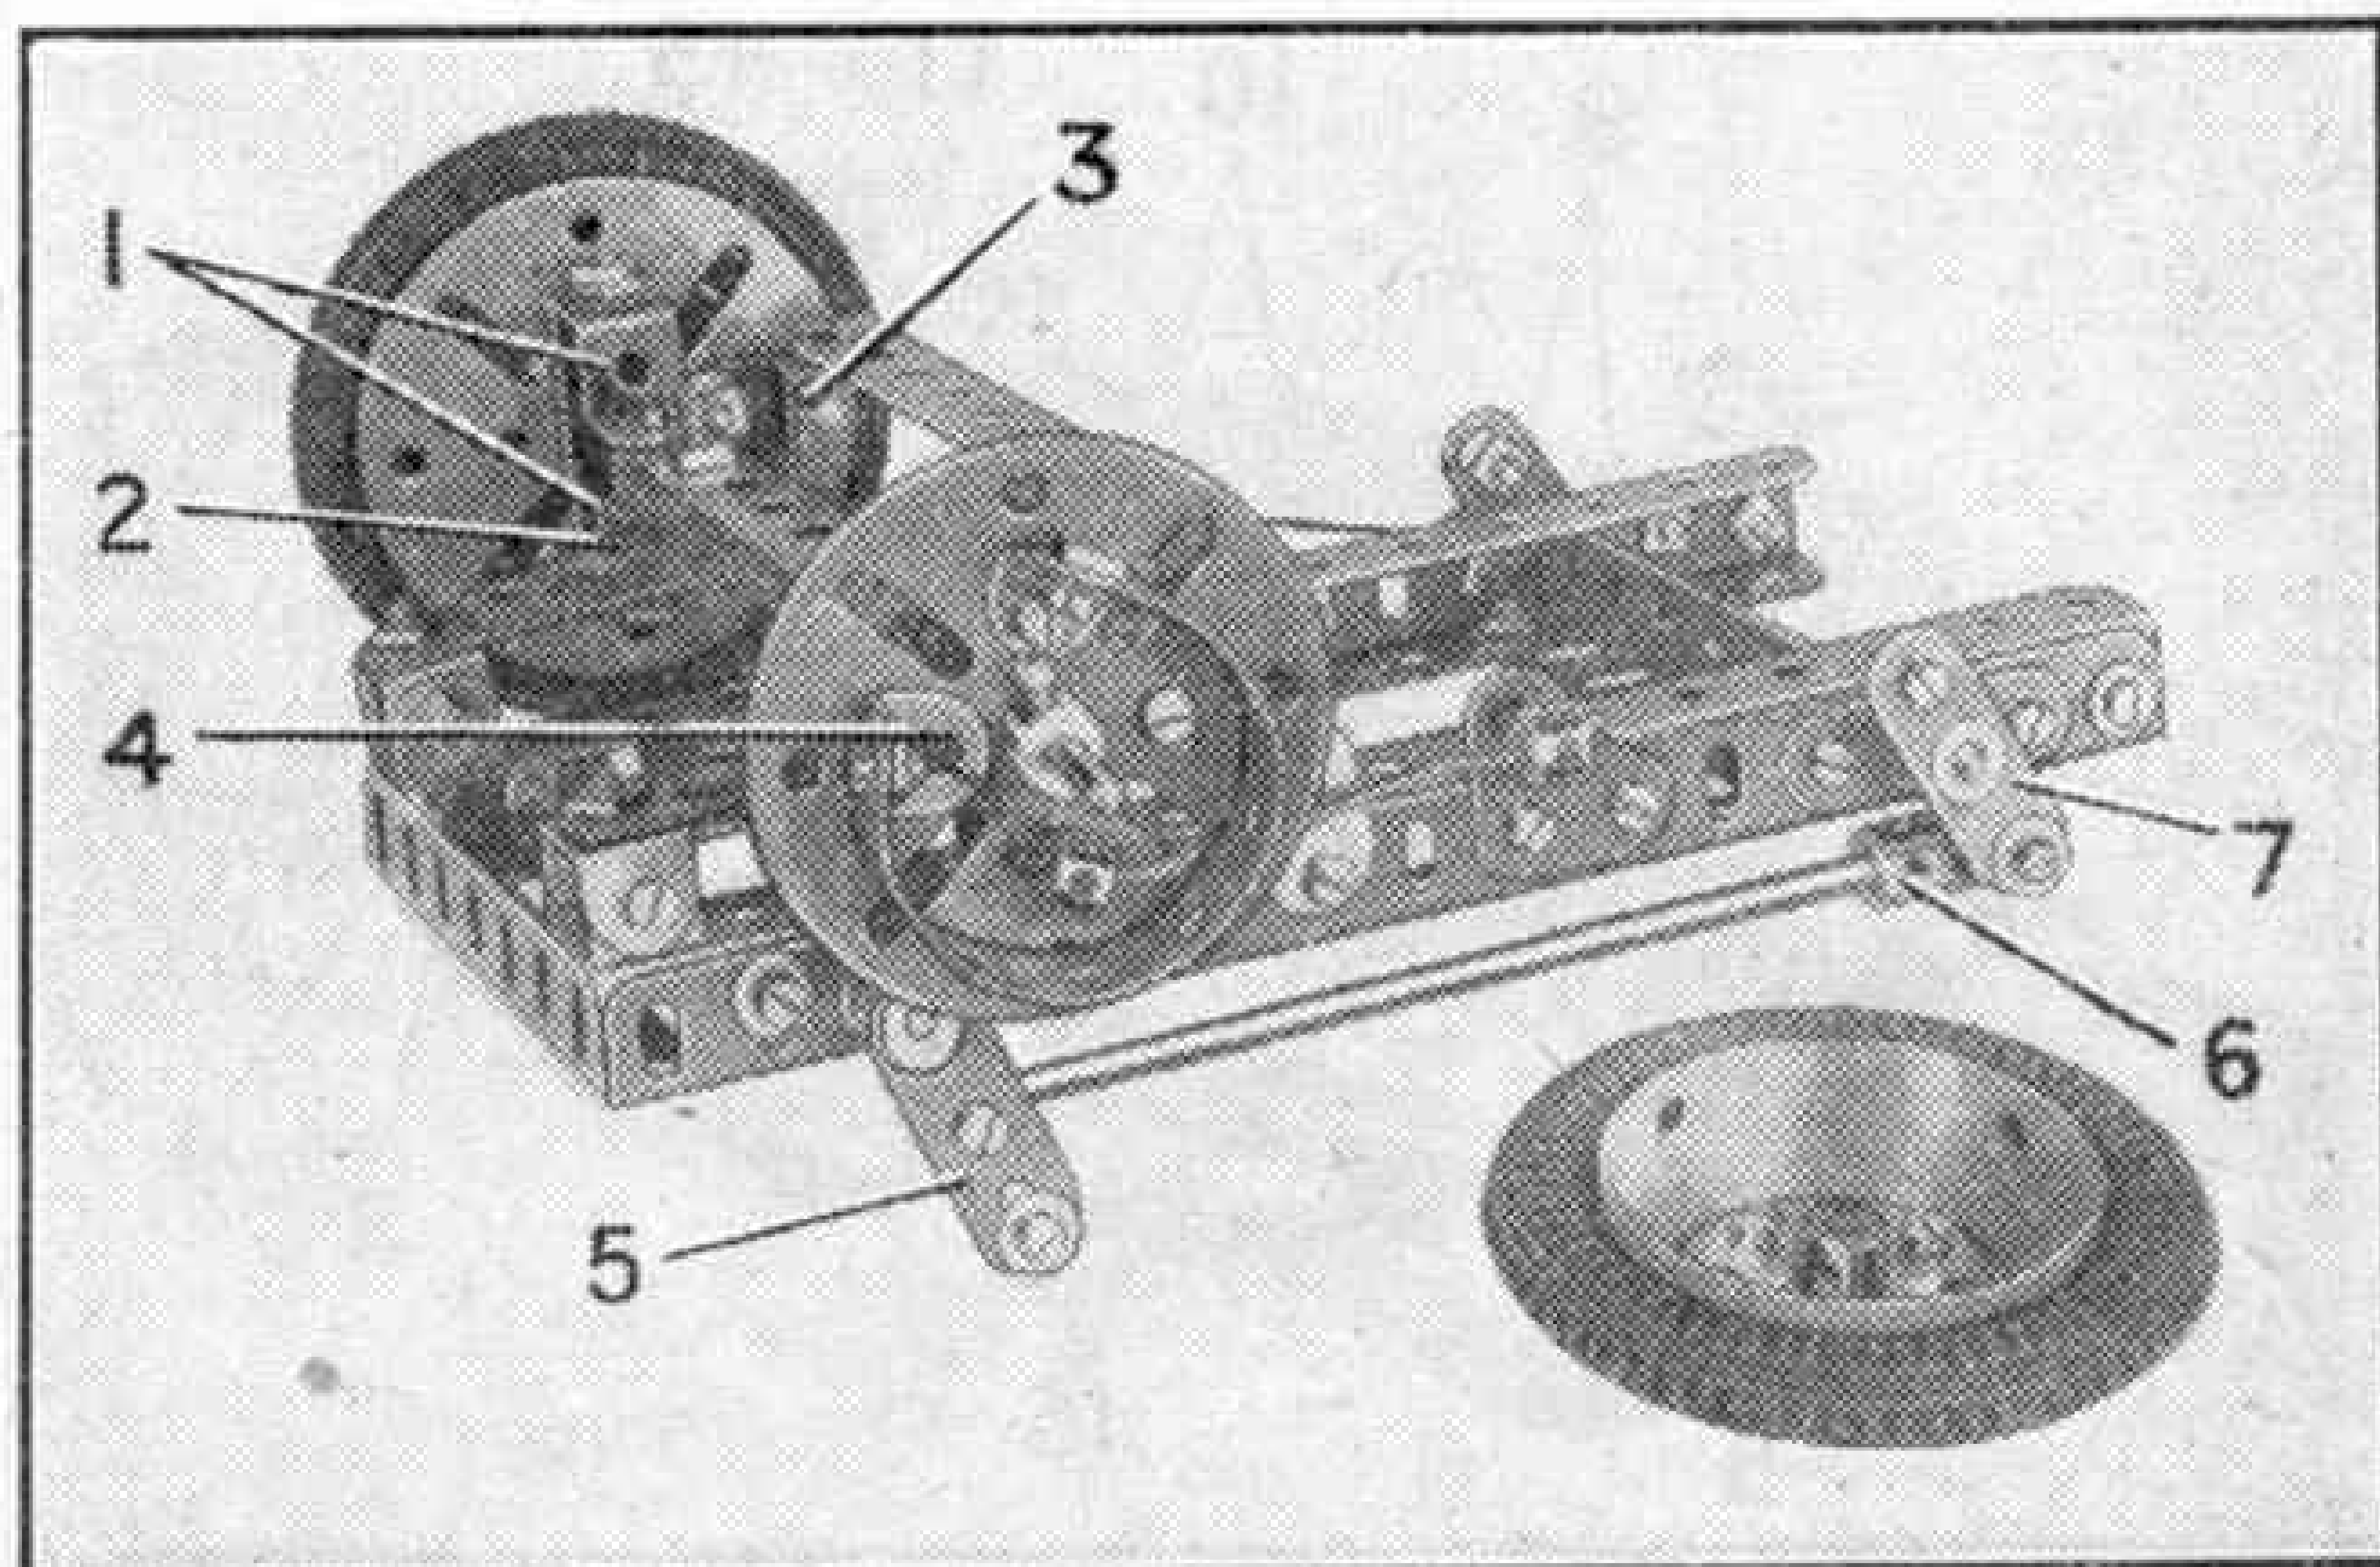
The front axle unit with one of the wheels removed to reveal the details of the brake mechanism.
